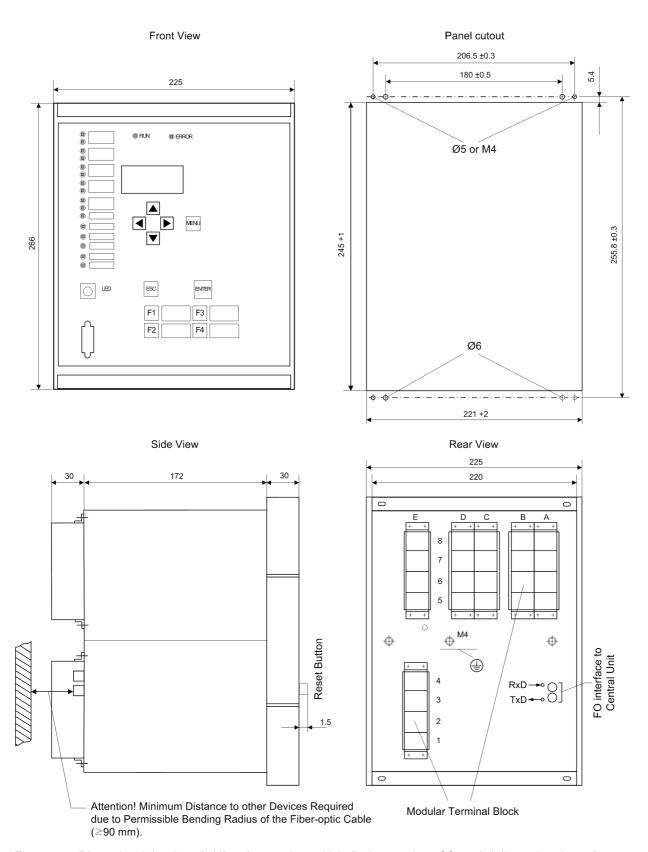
Dimensional drawing of 7XP20 for panel or cubicle flush mounting 7SS523 (all dimensions in mm)
